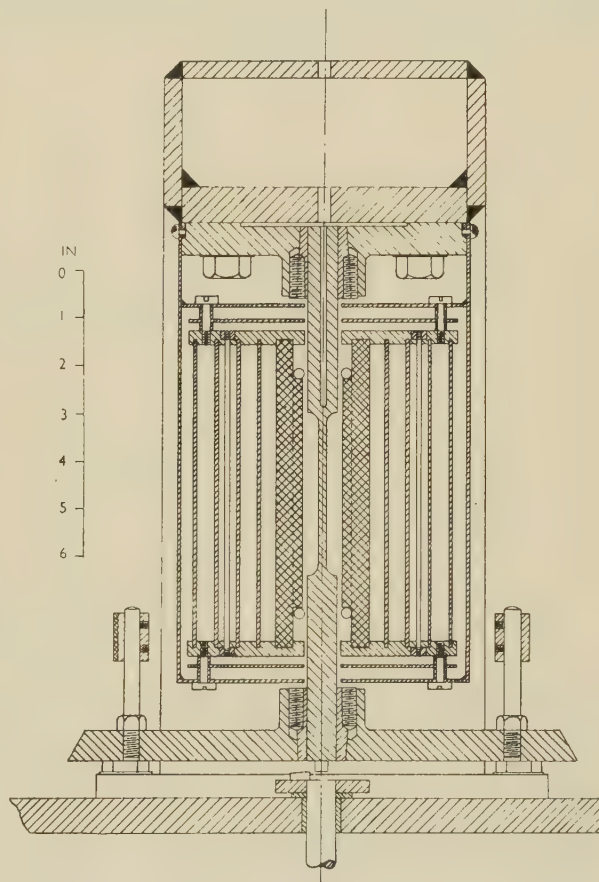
Sectional View of Specimen and Furnace Assembly.
